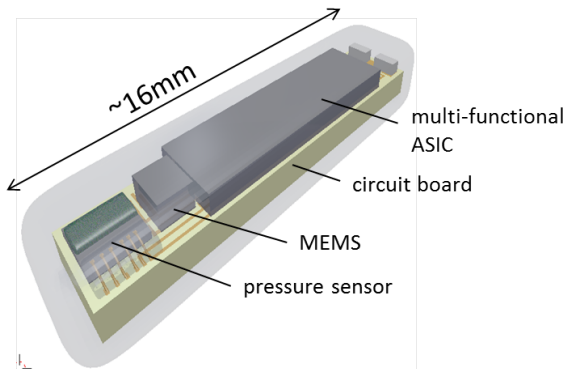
Basic assembly and packaging concept of the new multi sensor implant
